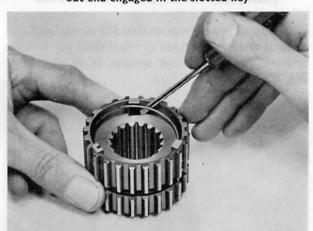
Installing the sliding key spring with one turnedout end, to the first and reverse hub
